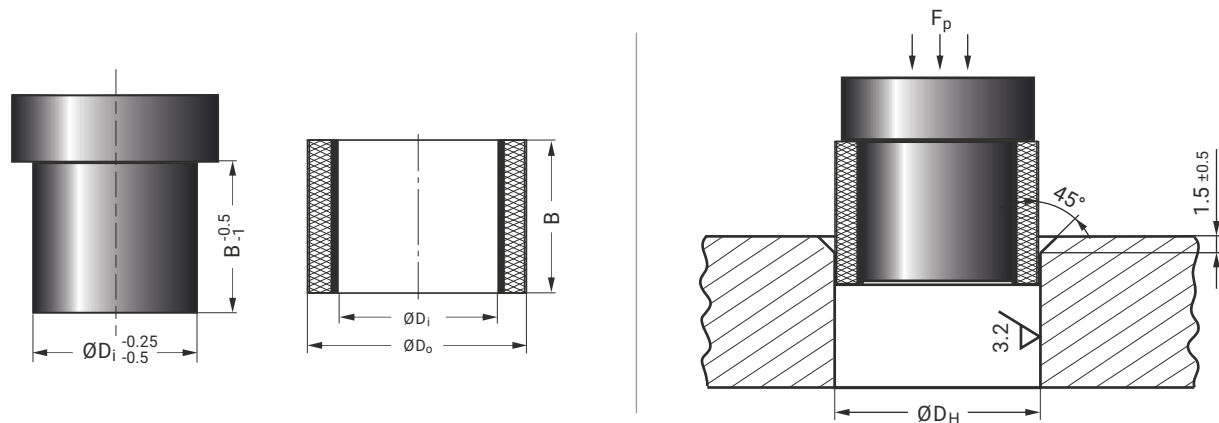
Installation of HPM / HPMB® bearings by press-fit
